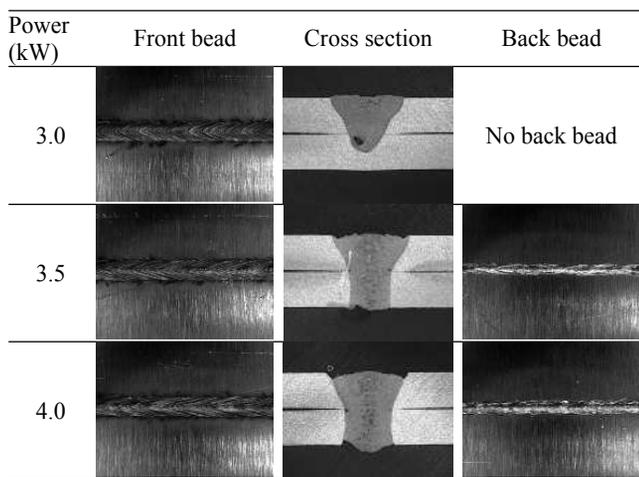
Bead shapes for various laser powers (focal point: -6 mm, welding speed: 6 m/min)
